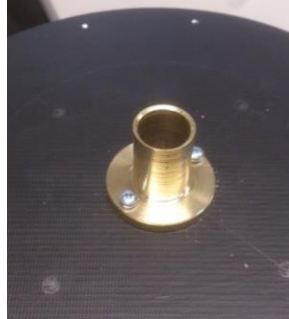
Coupling piece of the Savonius rotor with the shaft of support structure
